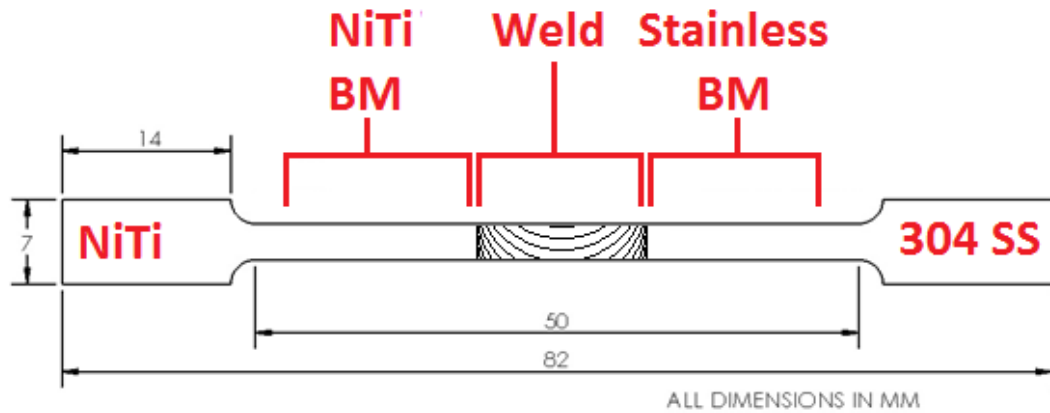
Schematic of gage lengths measured by multi-segment laser extensometer for NiTi-stainless steel Weld 9 tensile tests.
